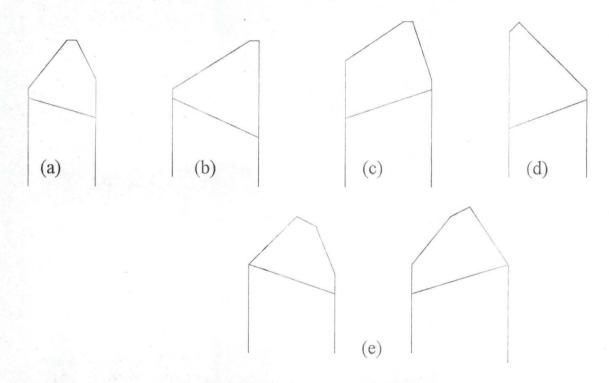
COMMONLY USED TOOL SHAPES FOR FACING (SURFACING)
